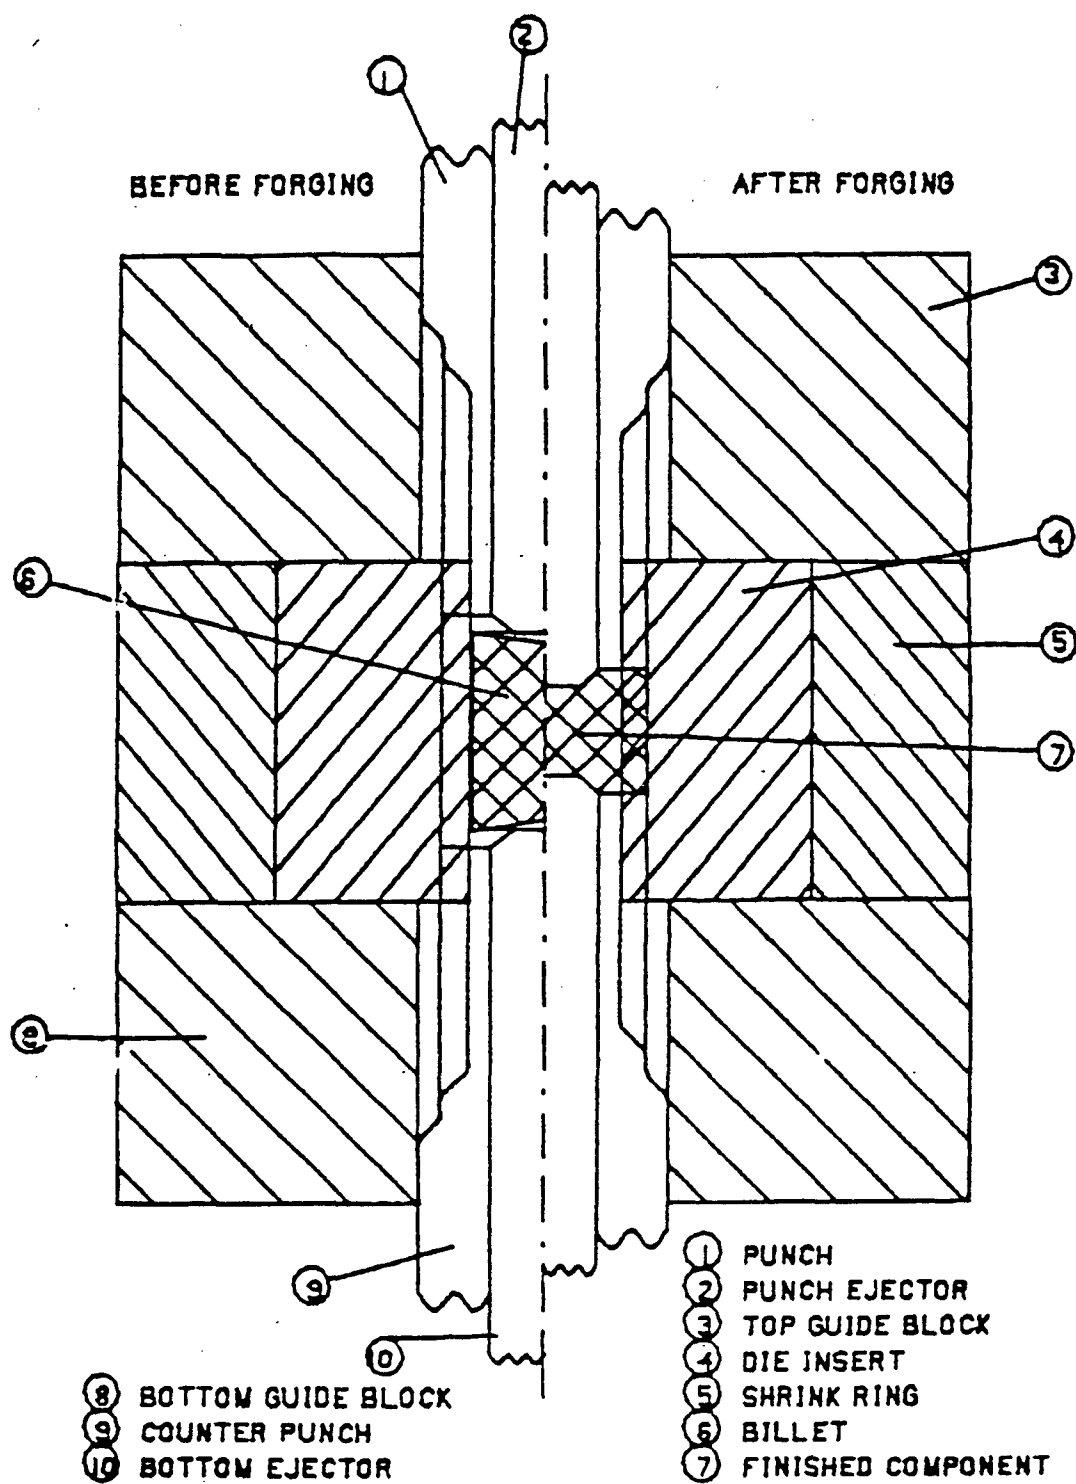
Suggested Tool Design for Cold Forging of Spur Gears
